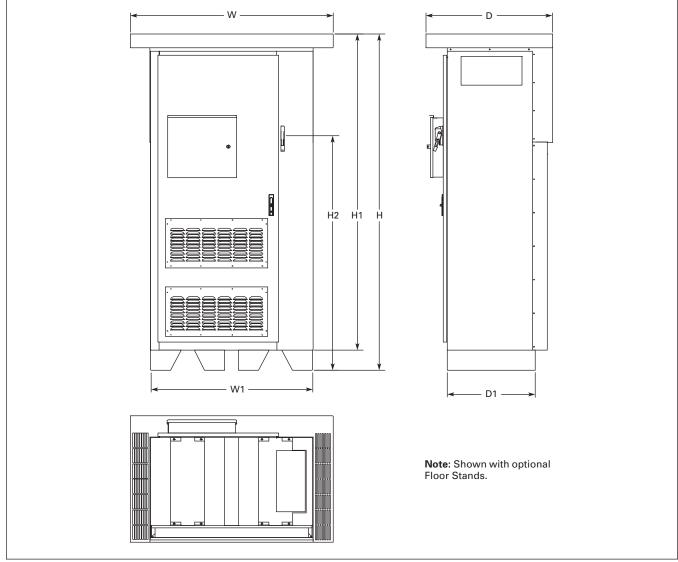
Enclosure Box E — UL Type 3R Dimensions
